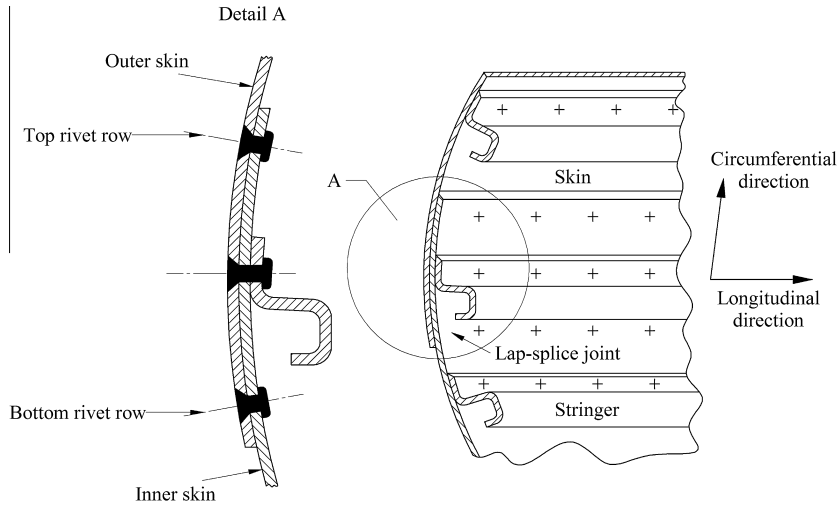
Typical fuselage longitudinal riveted lap splice joint.
